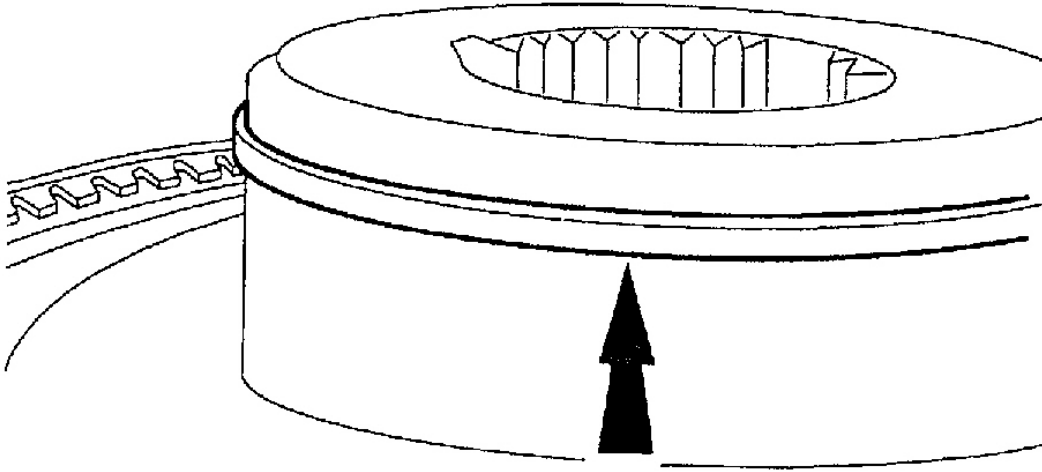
Output Shaft Ring Gear & Hub Shaft Assembly Component View
